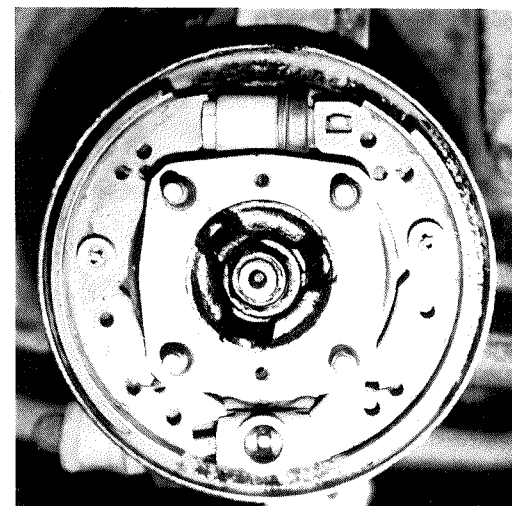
Location of rear slave cylinder (top) and brake shoe adjuster (bottom) can you see whats missing?
